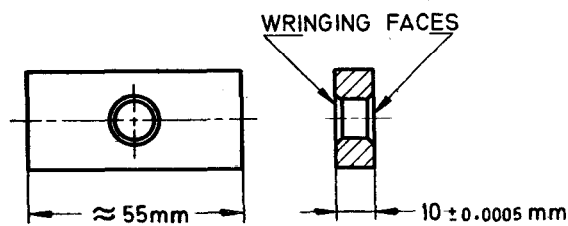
DIMENSIONS FOR SMALL PLANE-FACED JAW
